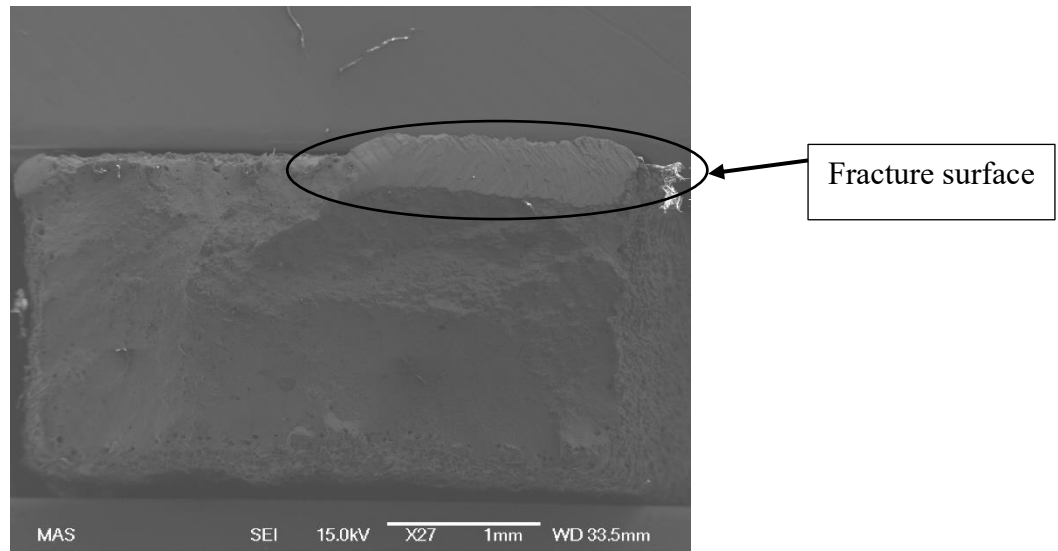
95: BP3 HT1 Fracture Surface x27
